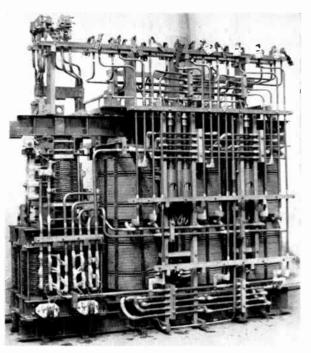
Assembled core and coils of a transformer for a 24anode mercury-arc rectifier
